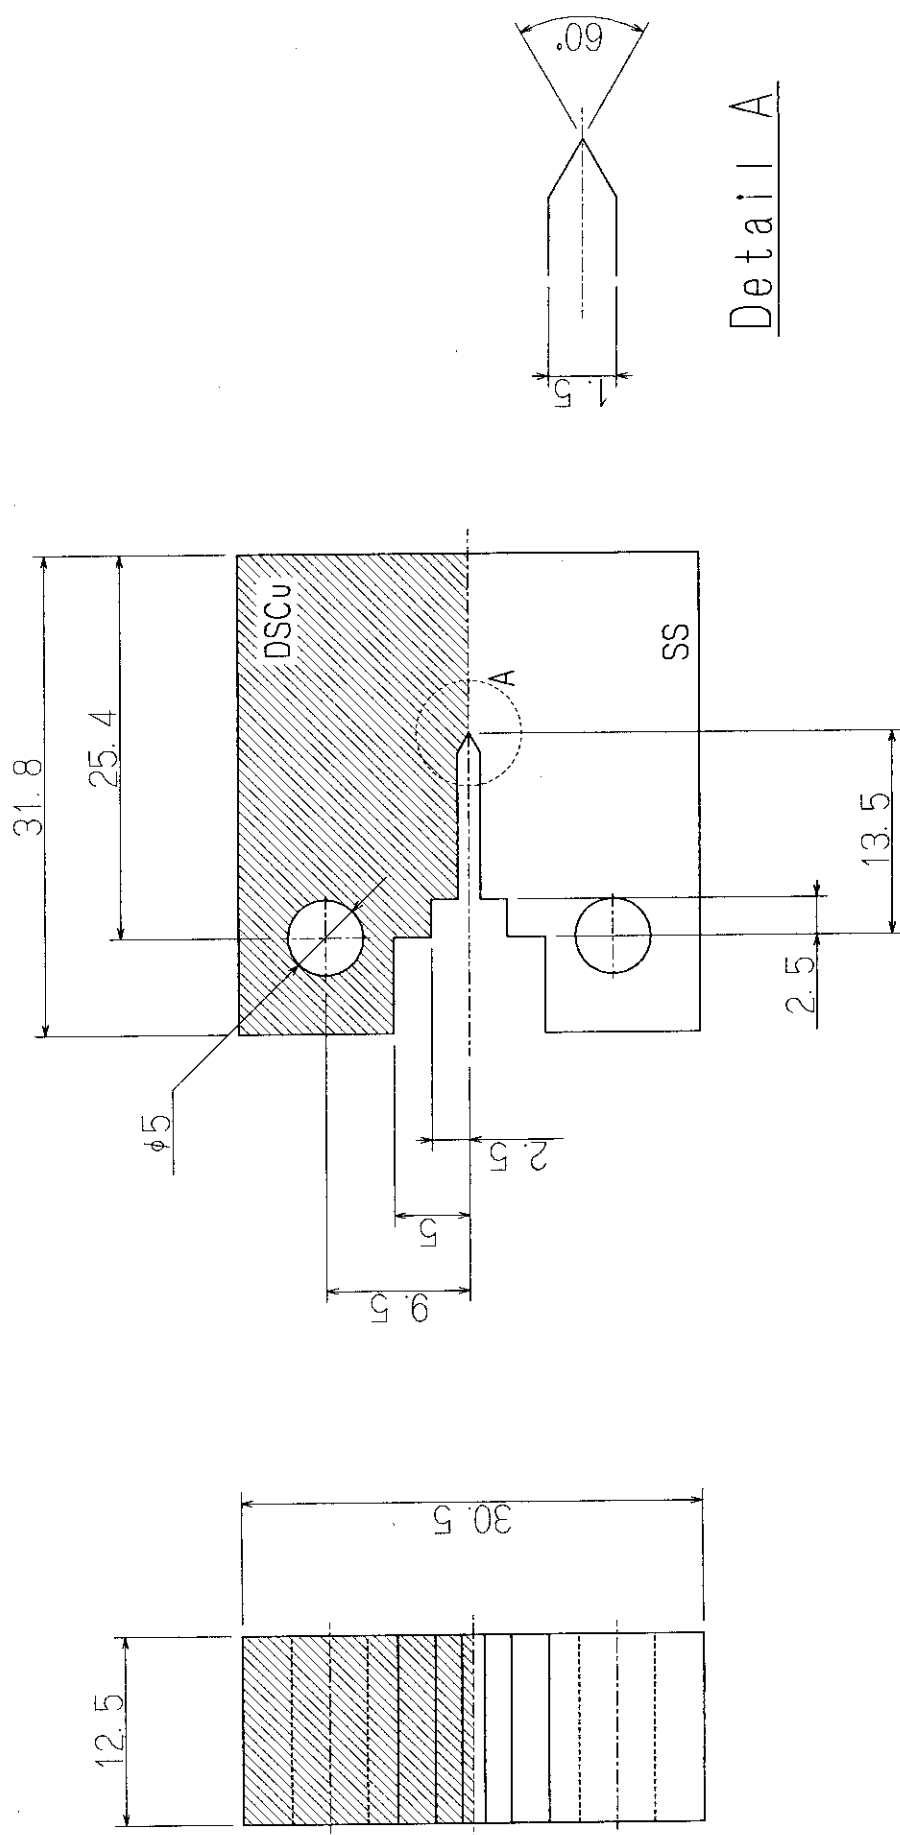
1. 10 Shape of fracture toughness test specimen
